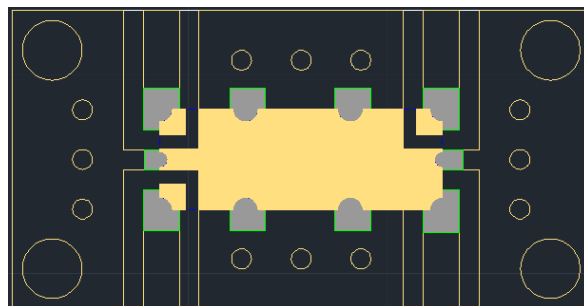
Placing the CMX25S03 on the 11 Points of the PCB Surface
